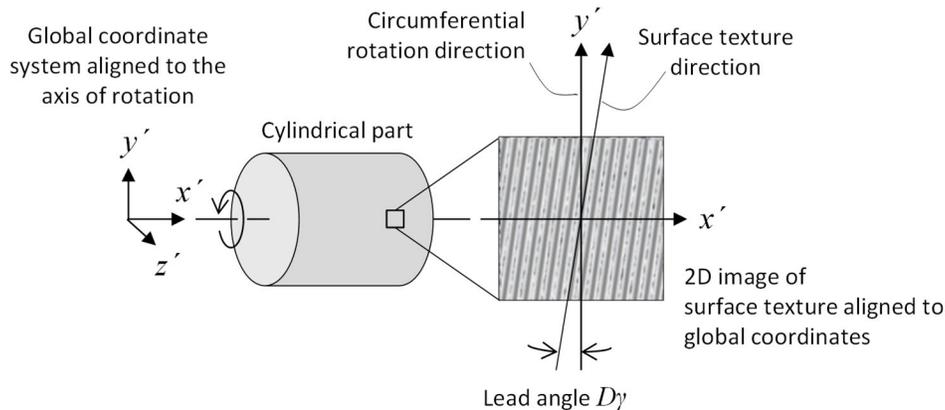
Geometrical definition of the machining lead angle for a cylindrical part.
